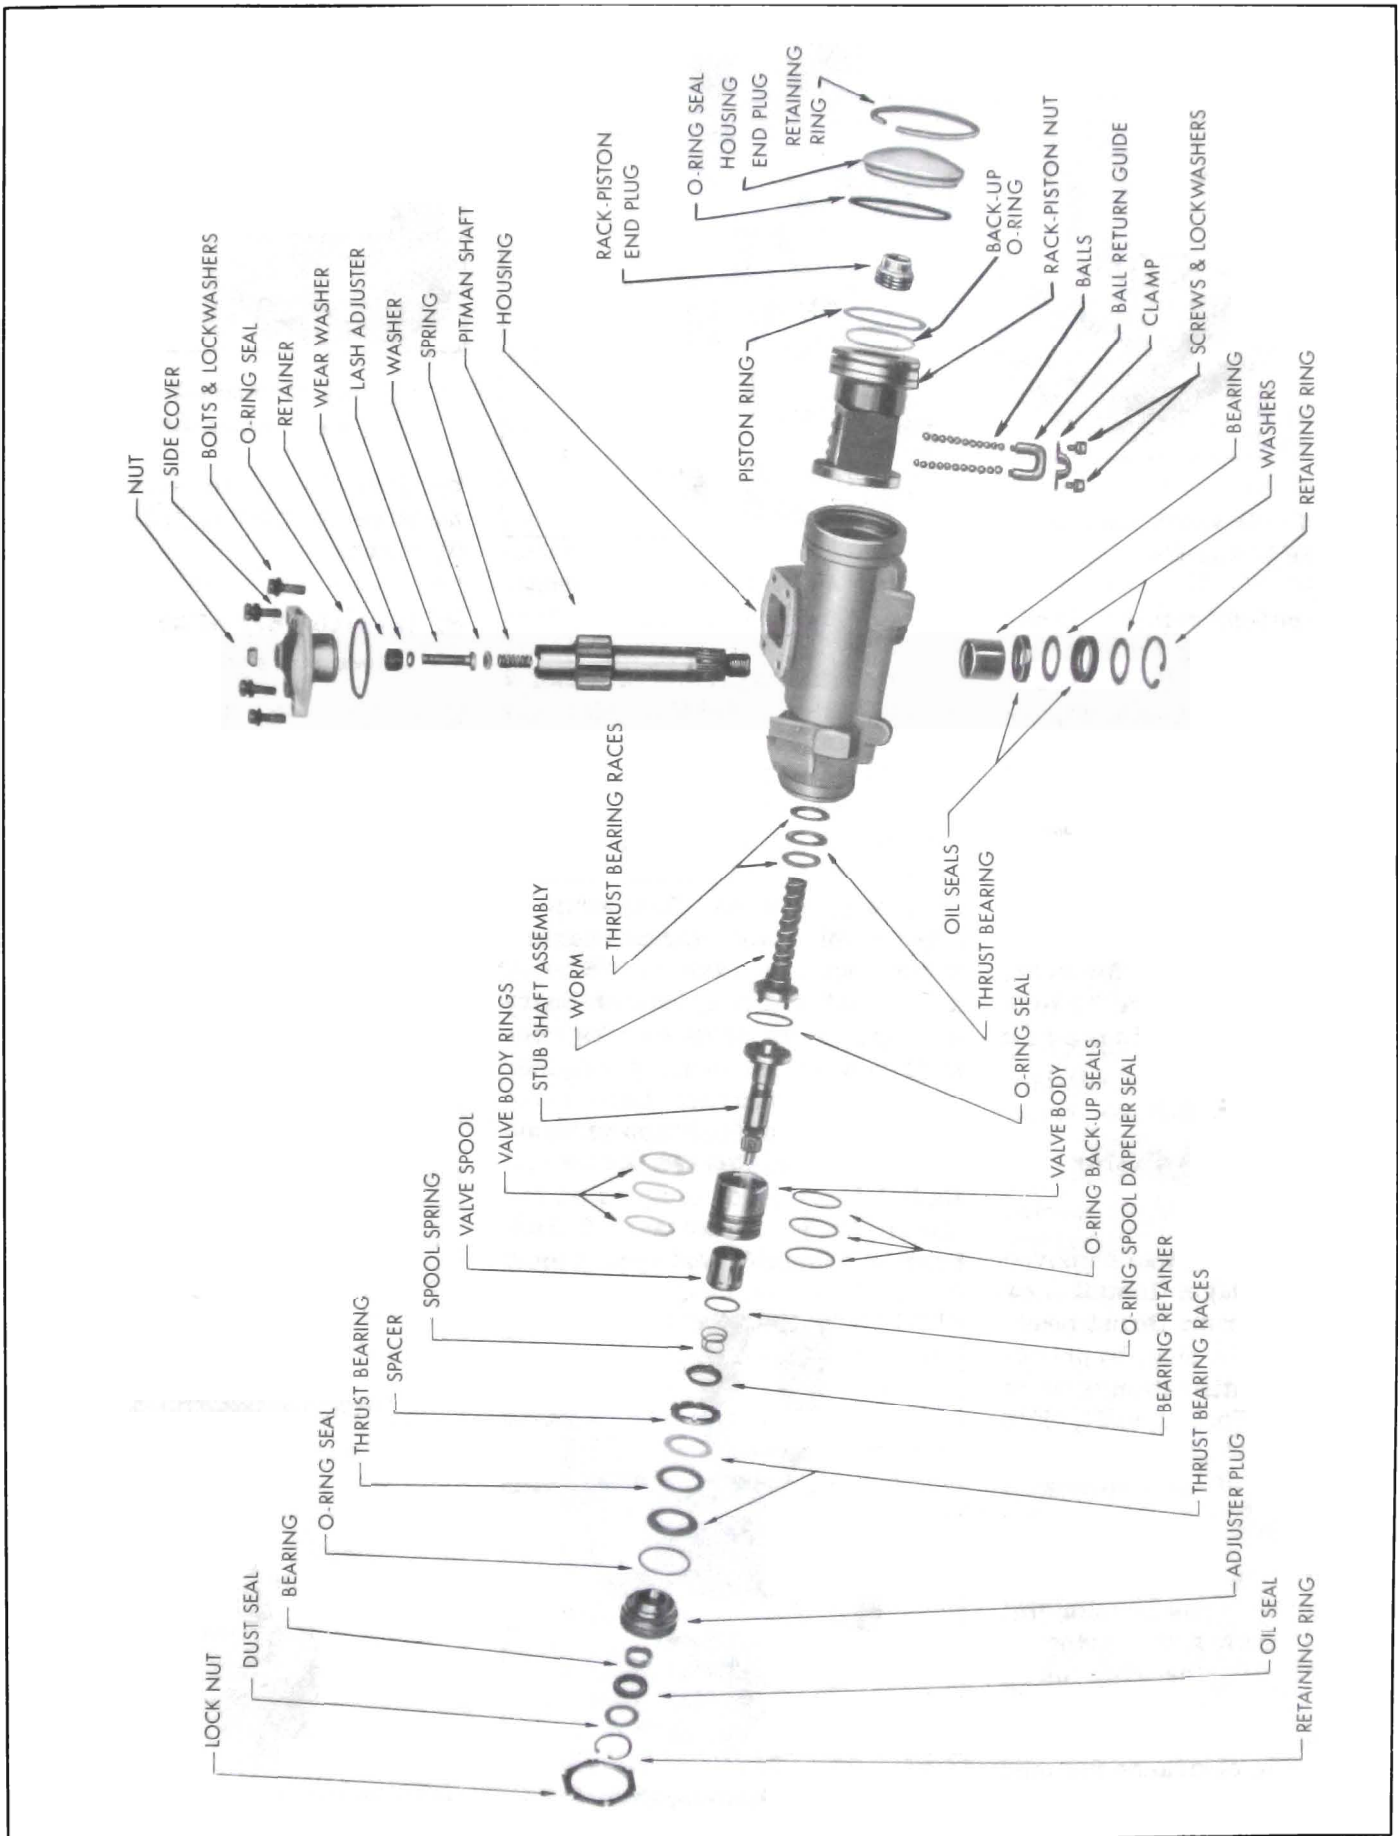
Exploded View of Rotary Valve Steering Gear
